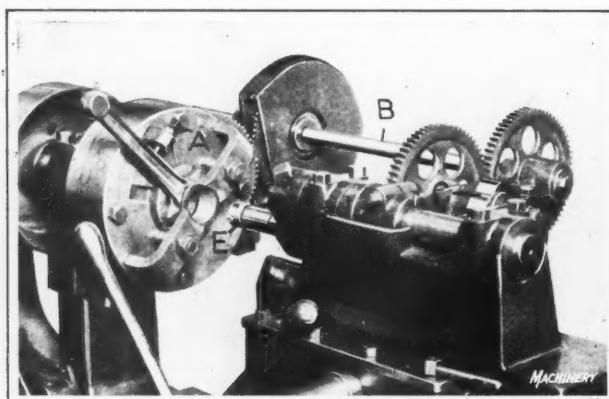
Tooling developed for boring Automobile Connecting-rods elliptically
